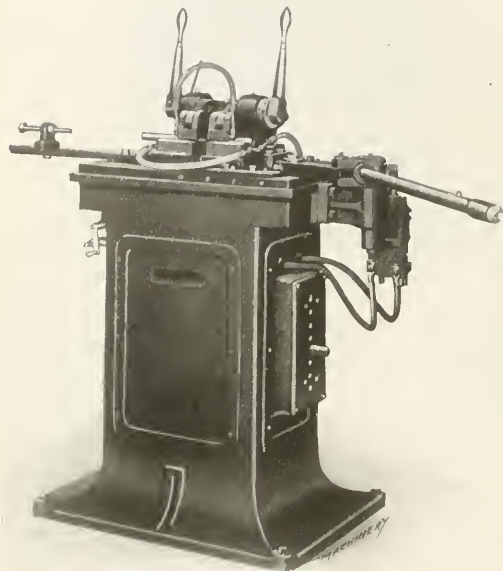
Detroit Type P Electric Butt Welding Machine
